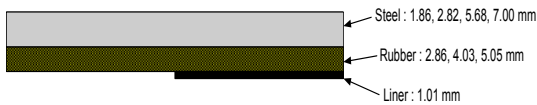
Sectional View of Steel/Rubber Adhesive Test Block
